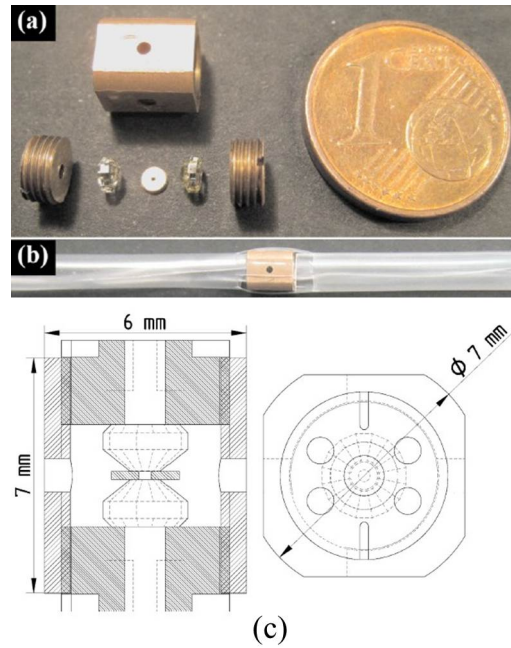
TM-DAC: (a) parts; (b) the assemble TM-DAC in the standard plastic straw holder of MPMS; (c) drawing of the cell with key dimensions. [11]
